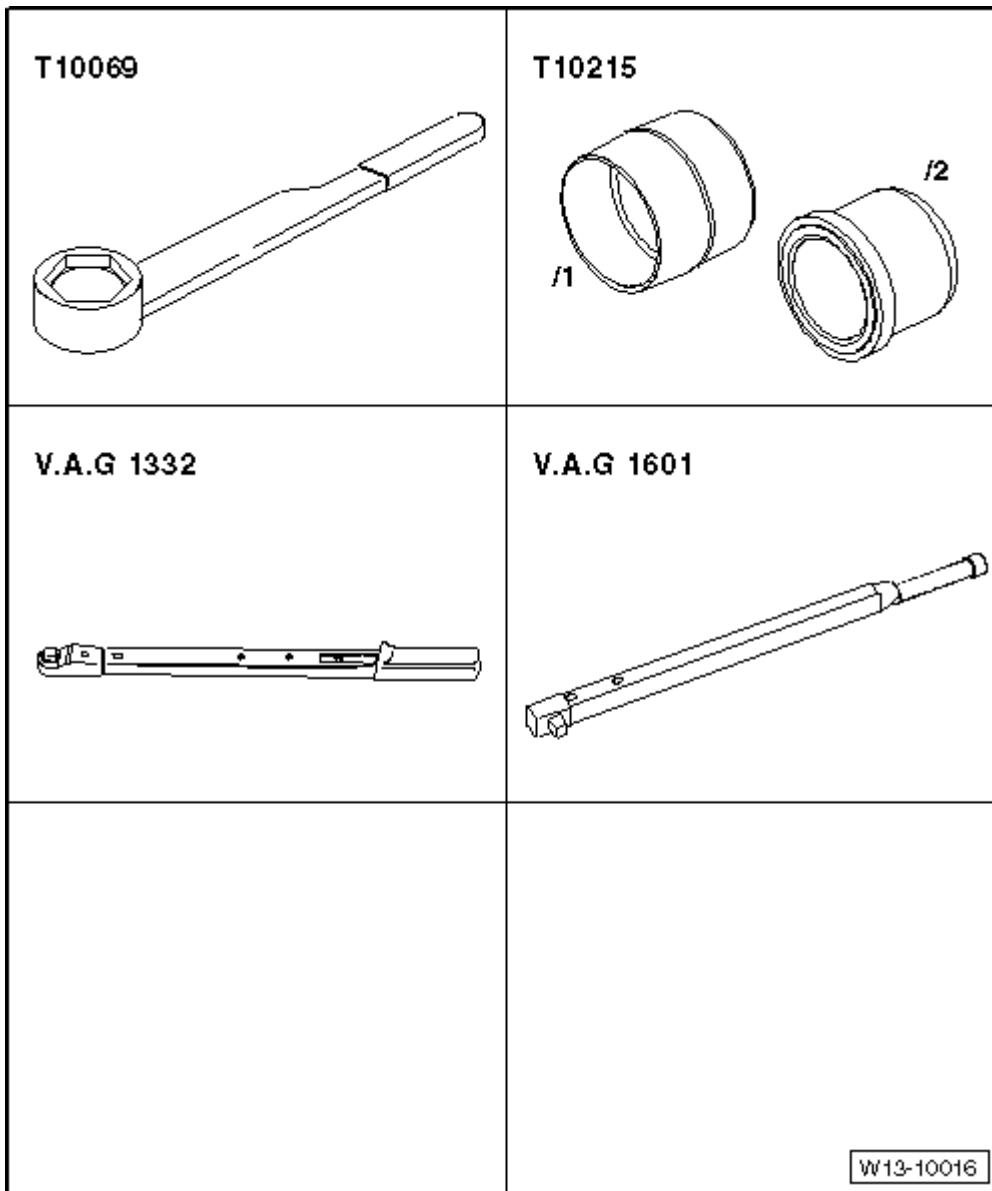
Identifying Special Tools - Sealing Flange For Crankshaft (Harmonic Balancer Side), Replacing
